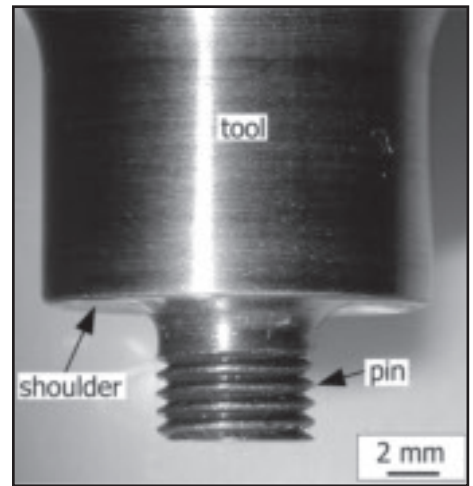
Tool with a 15-mm-diameter shoulder for FSSW with augmented torque.
